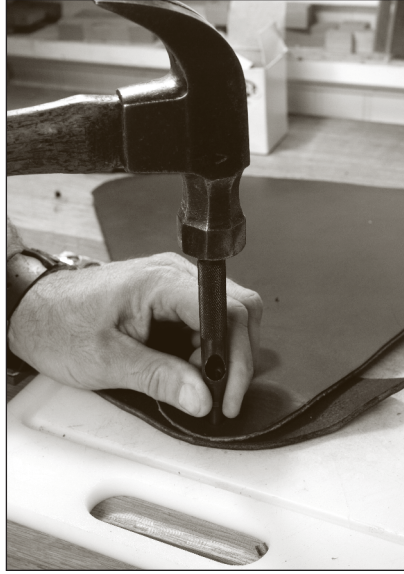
First punch. Using a leather punch, make a hole through the seat and pocket piece. I'm using a kitchen cutting board as a backer.
